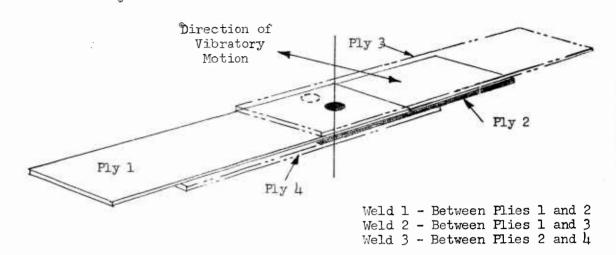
GEOMETRY OF PLY-BY-PLY ASSEMBLY
